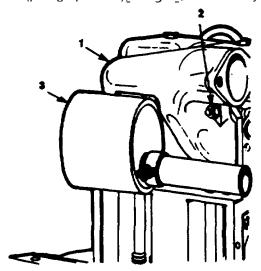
Intake and Exhaust Manifold Securing Bolts
